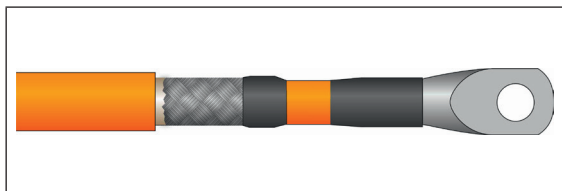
Step 8: Placing/fixing the heat-shrink tubing
